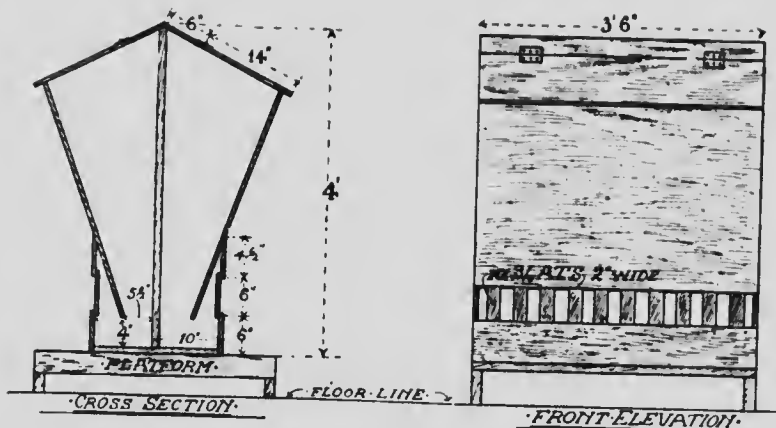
Showing construction of an outdoor hopper for dry mash or whole grain.
